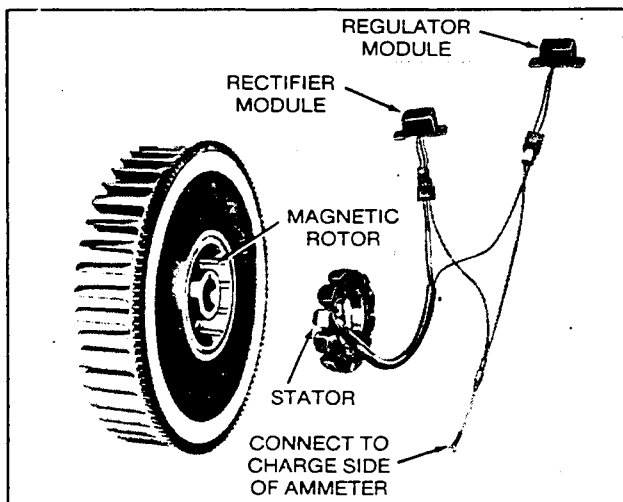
10 AMP FLYWHEEL ALTERNATOR
